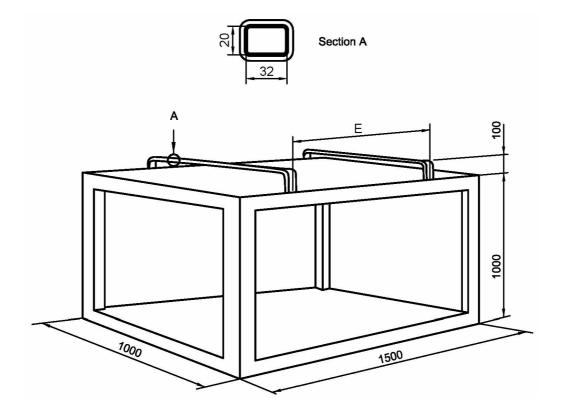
Example of typical test bench (Detail - A Dimension of test bench bars)
